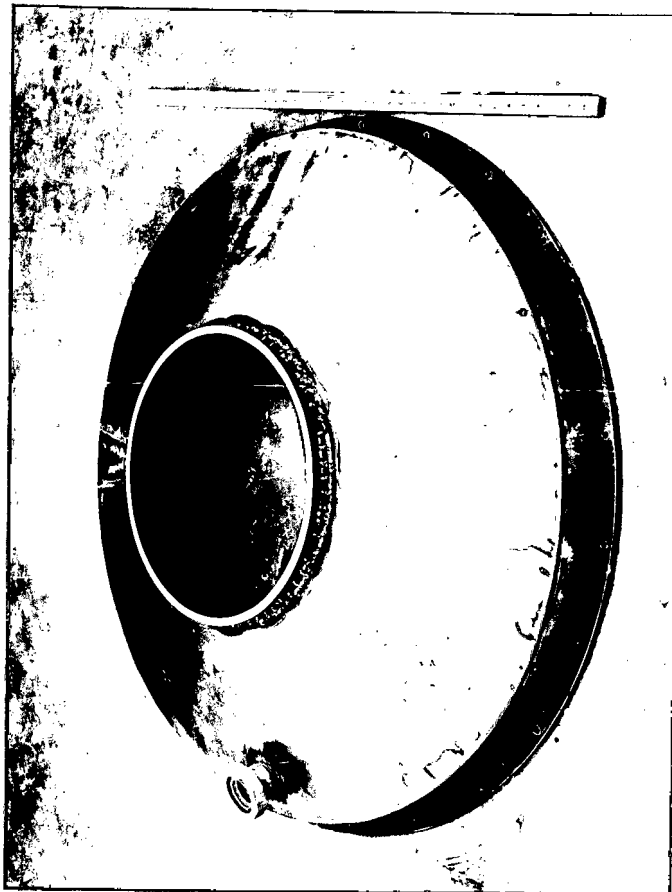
Lower Section of Outer Shell and Bottom of Unit
